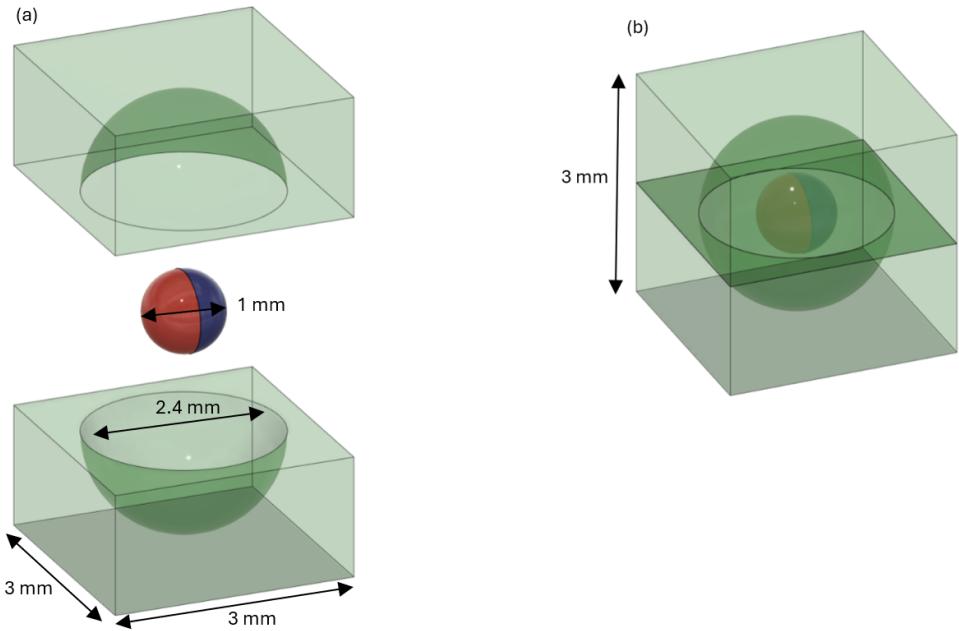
Initial Microrobot Design. (a) Exploded view of the module design, containing a 3D printed cubic case and magnetic ball. (b) Assembled individual module.
